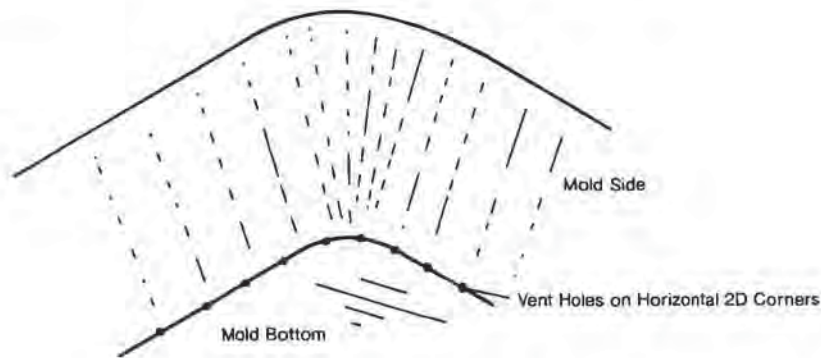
Uniformly spaced vent hole locations on horizontal two-dimensional corners in female mold
